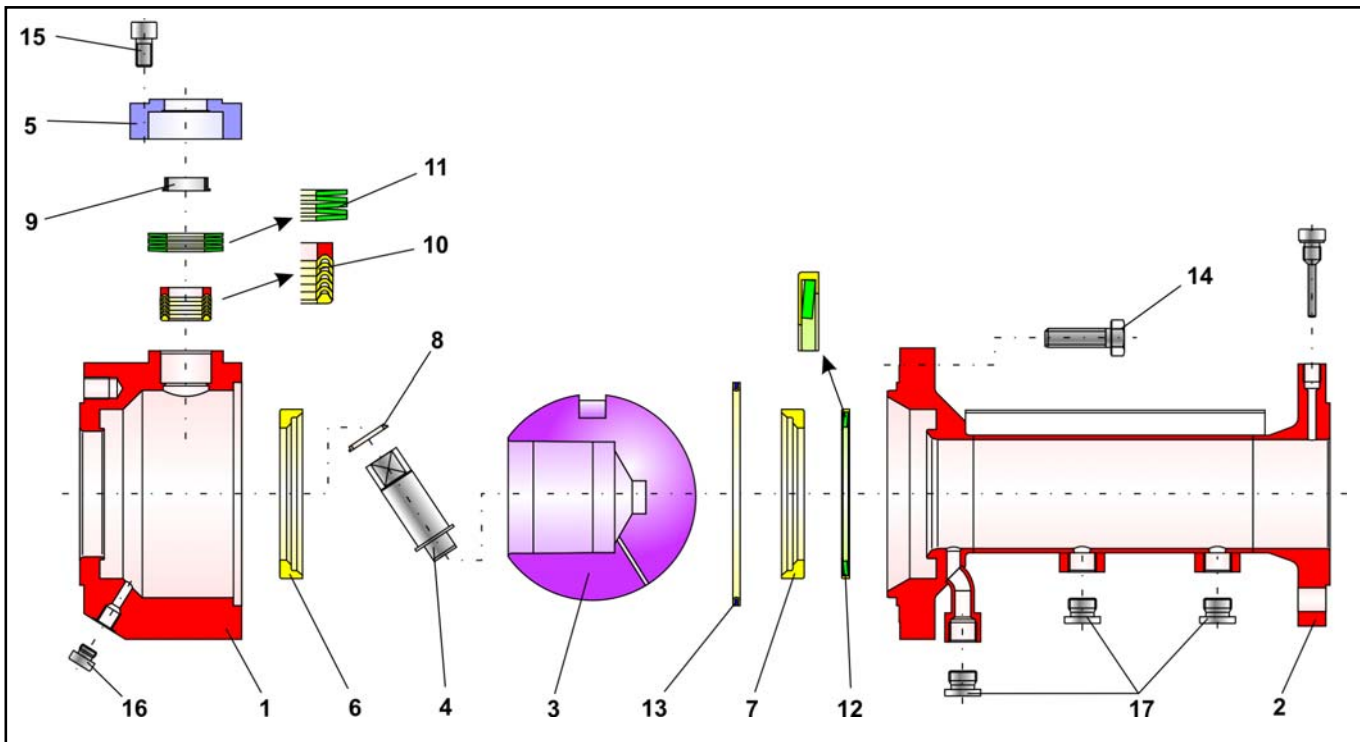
Explosion drawing of pig loading ball valves DN 50 up to DN 100
